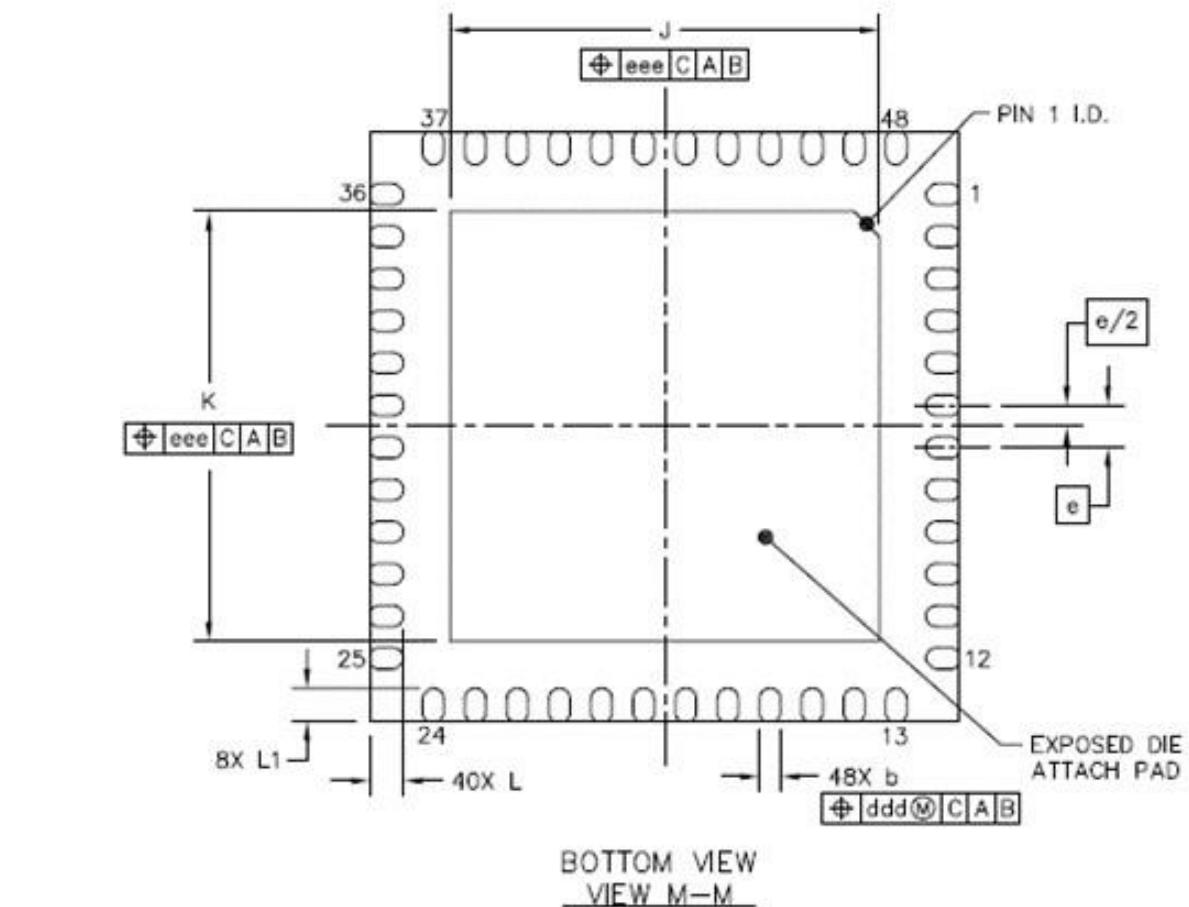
AU5411 48 pin, 7x7 QFN package dimensions
